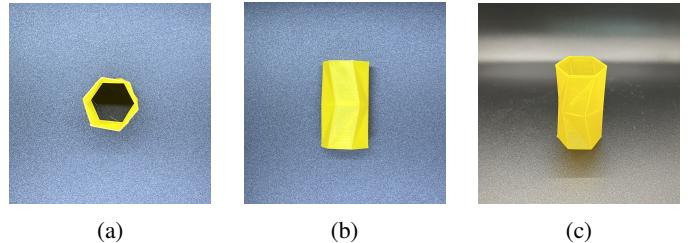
(a) Top view, (b) front view, and (c) isometric view of Kresling origami body module printed with PolyFlex™TPU95 on an Ultimaker S5.
